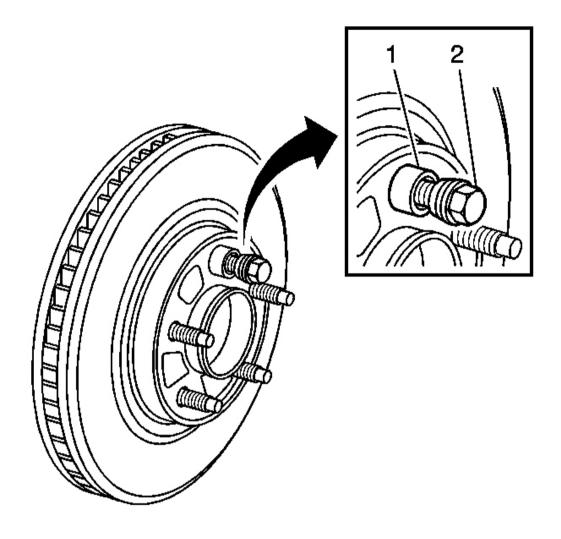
Identifying J 45101-100 Courtesy of GENERAL MOTORS CORP.
